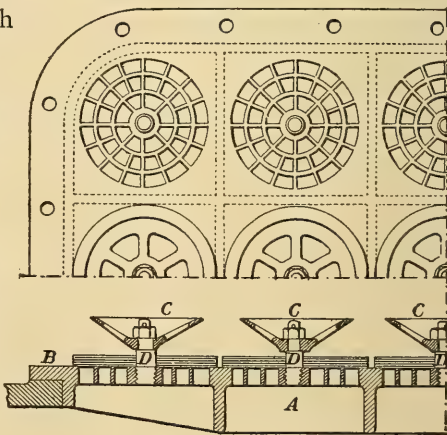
Arrangement of Valves adopted for Air Pump.
